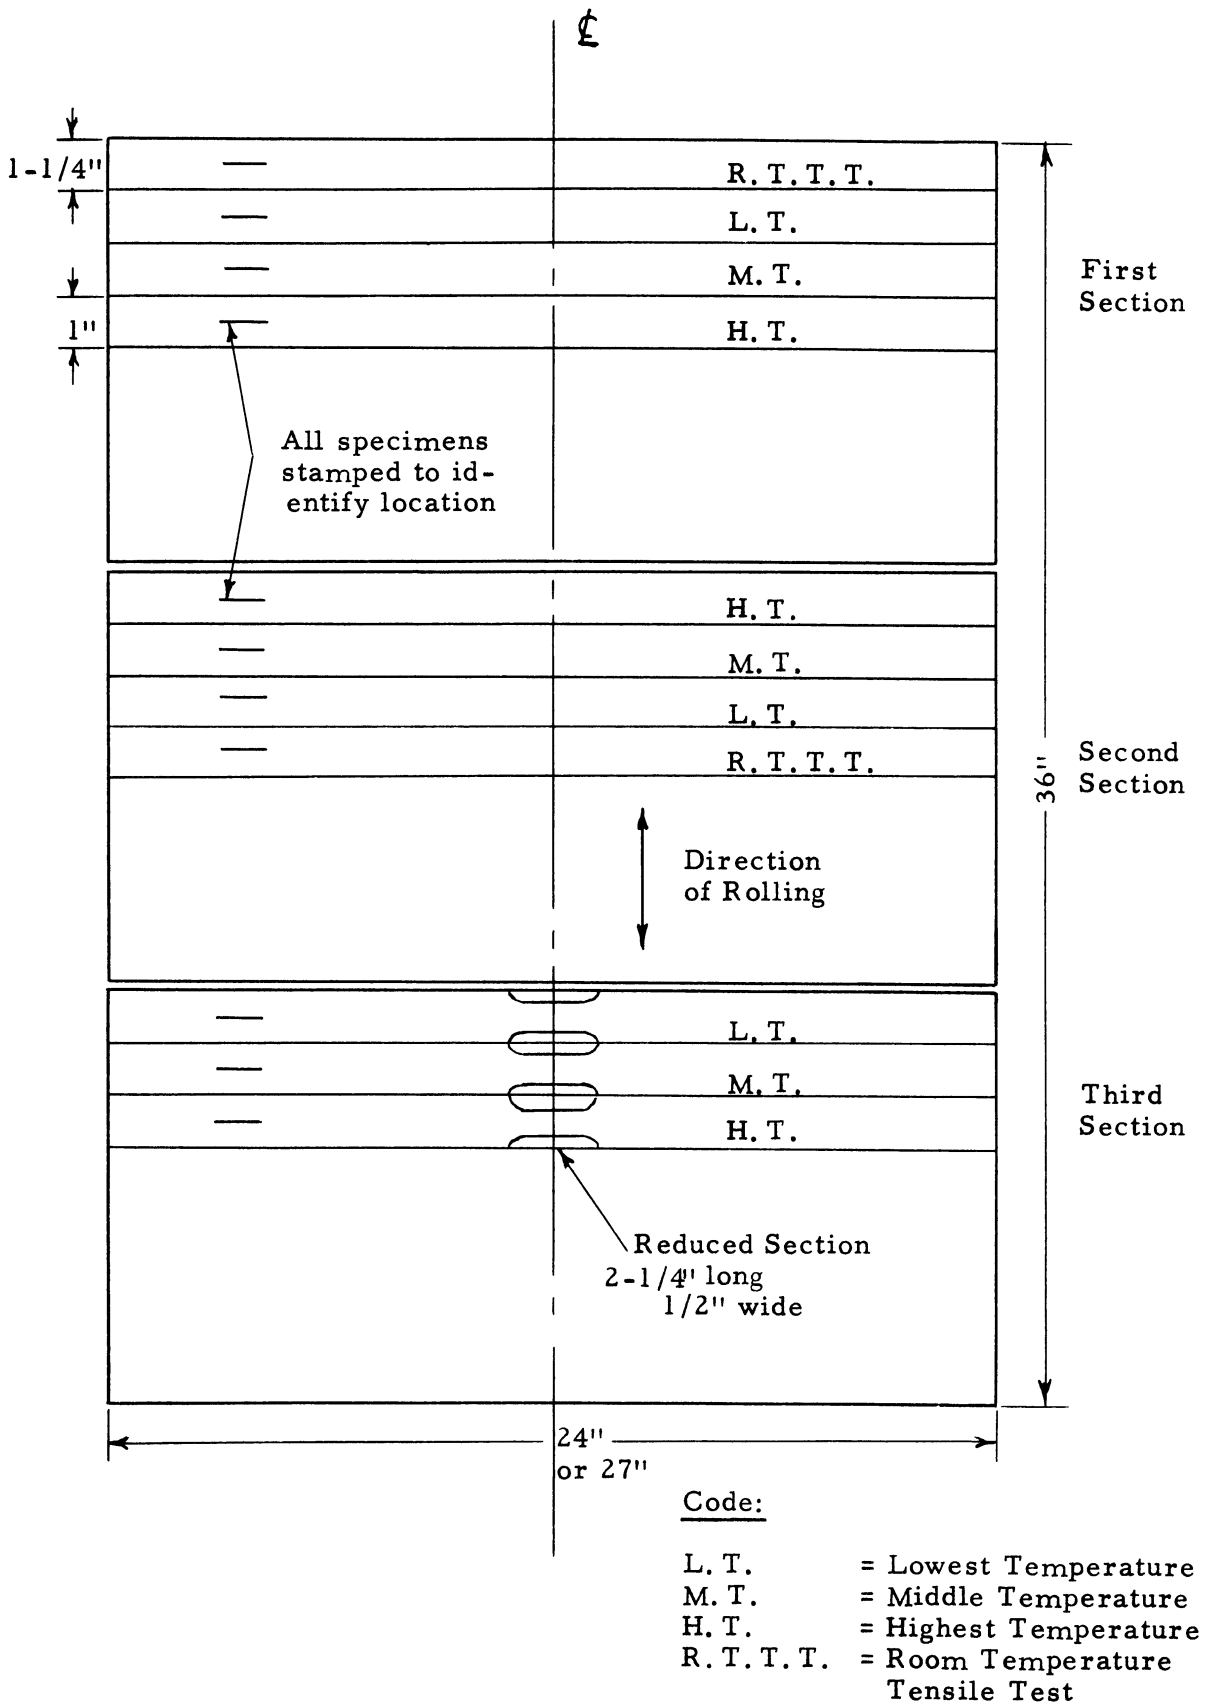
Sketch Indicating Sampling Procedure of Sheet Materials Submitted with the 36-Inch Dimension Parallel to Direction of Rolling.
